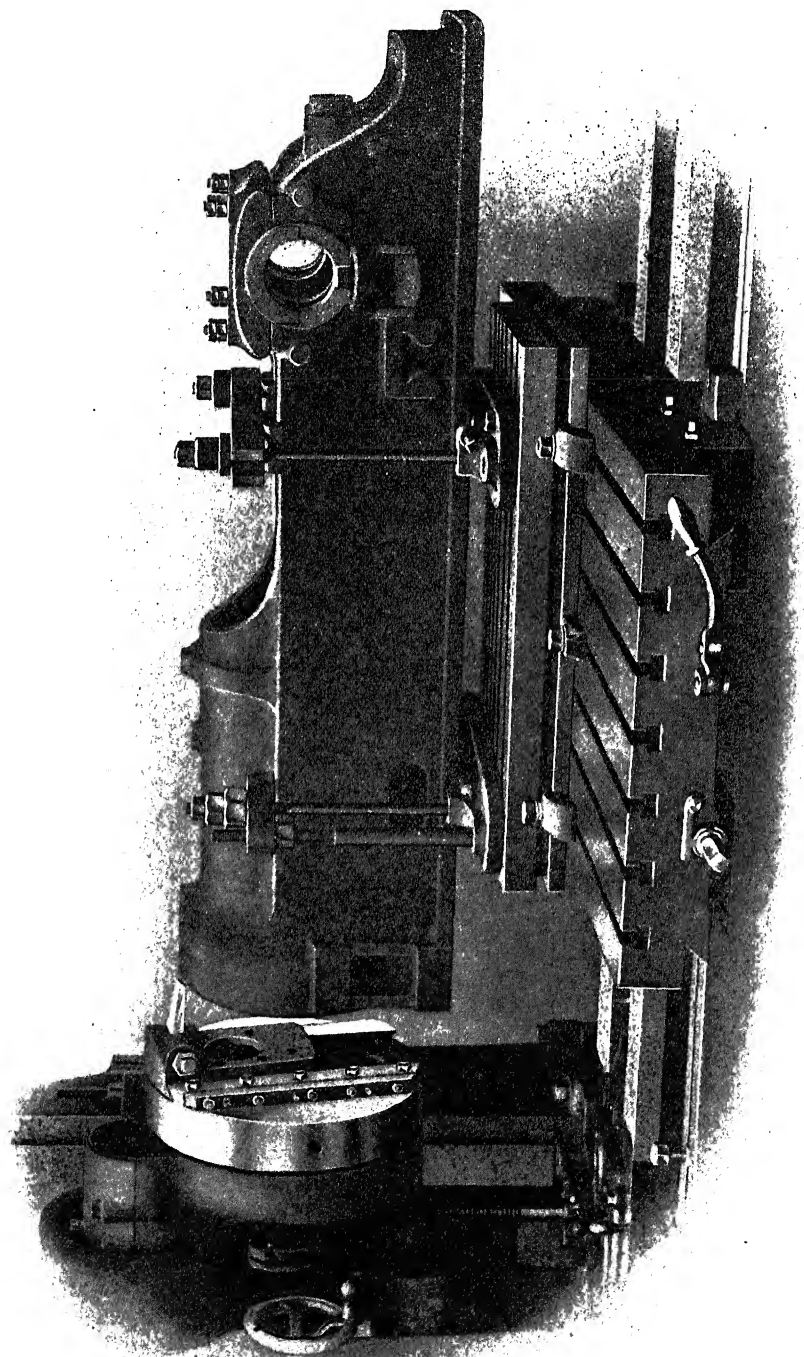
Facing Cylinder End of Gas-engine Bed. Followed by boring and milling seatings
